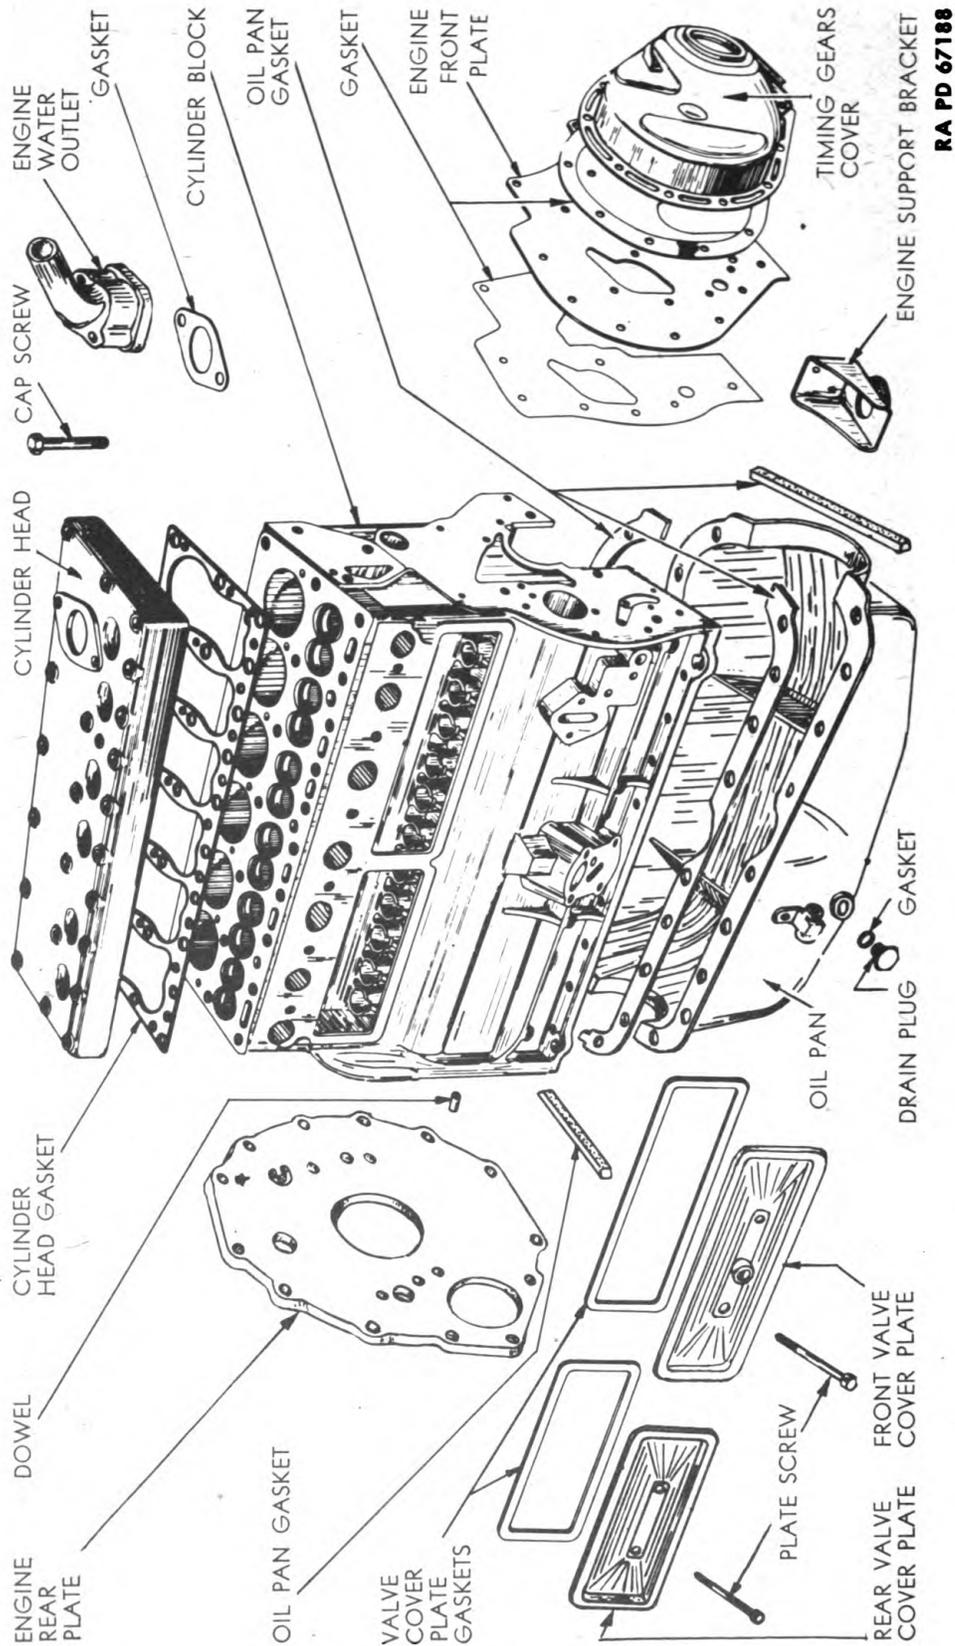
Cylinder Block, Head, Oil Pan, and Parts
